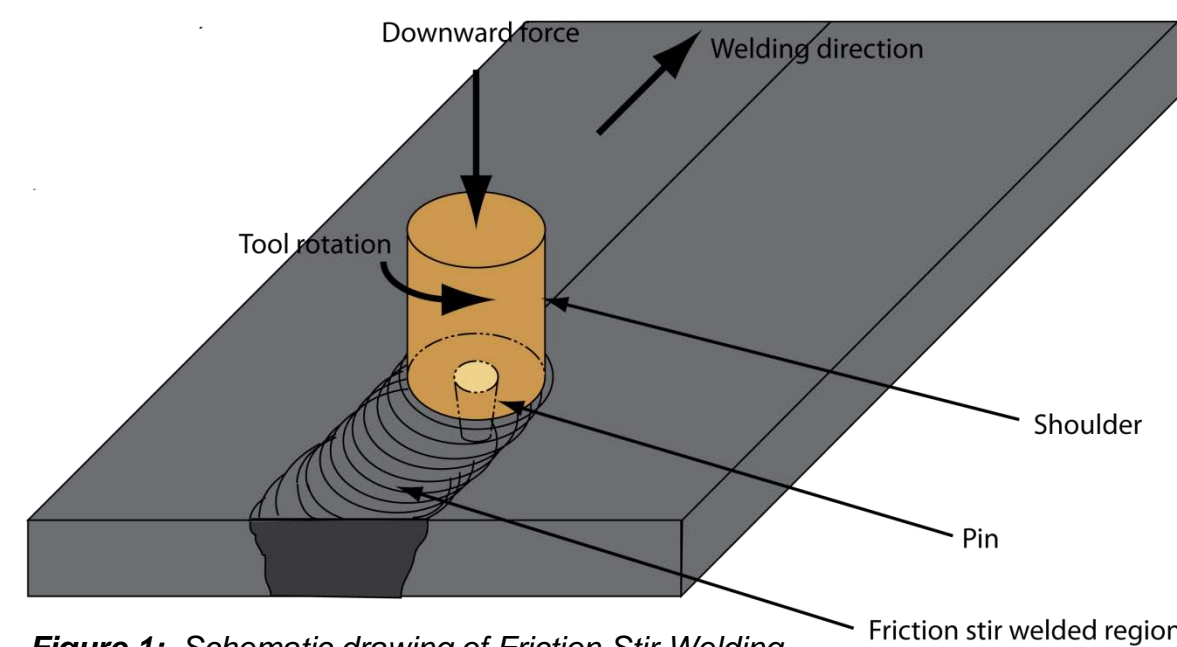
Schematic drawing of Friction Stir Welding
